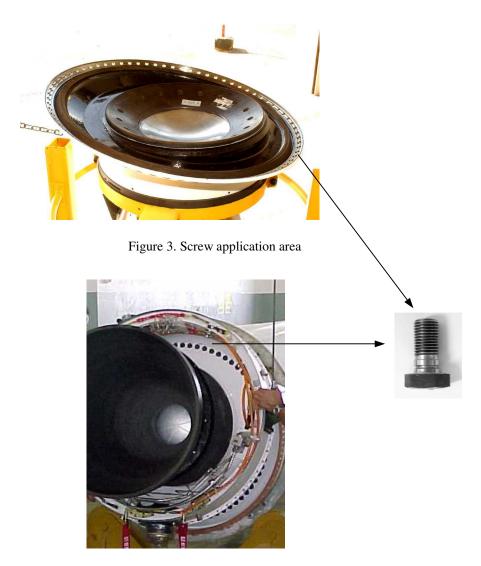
Aft cover fixed in a VLS-1 rocket engine.
